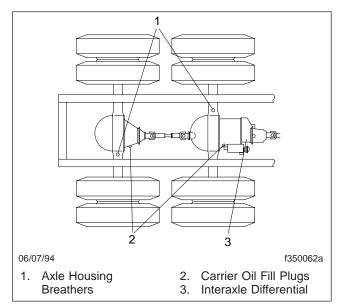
, Fill Hole Plug and Axle Housing Breather Locations
